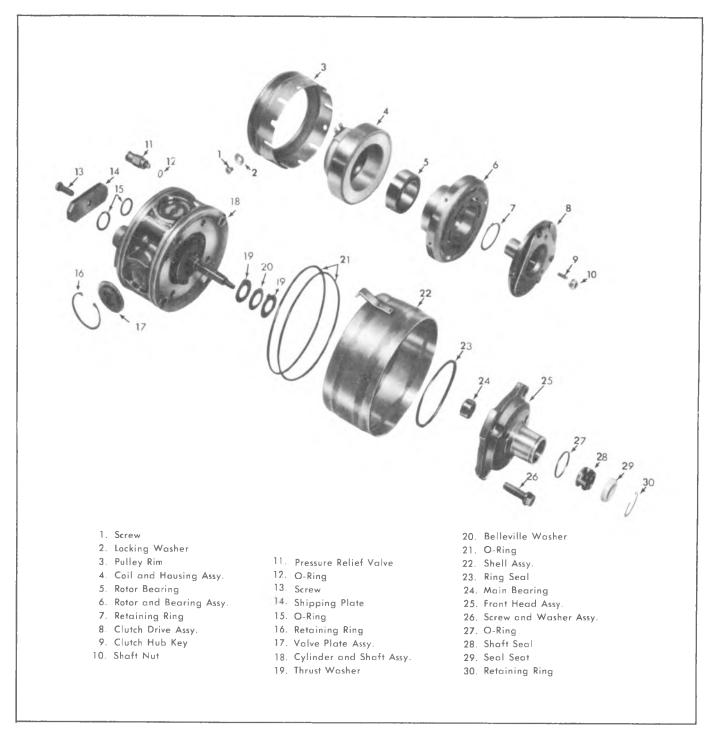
B-5-Radial Four Cylinder Compressor-Exploded View
